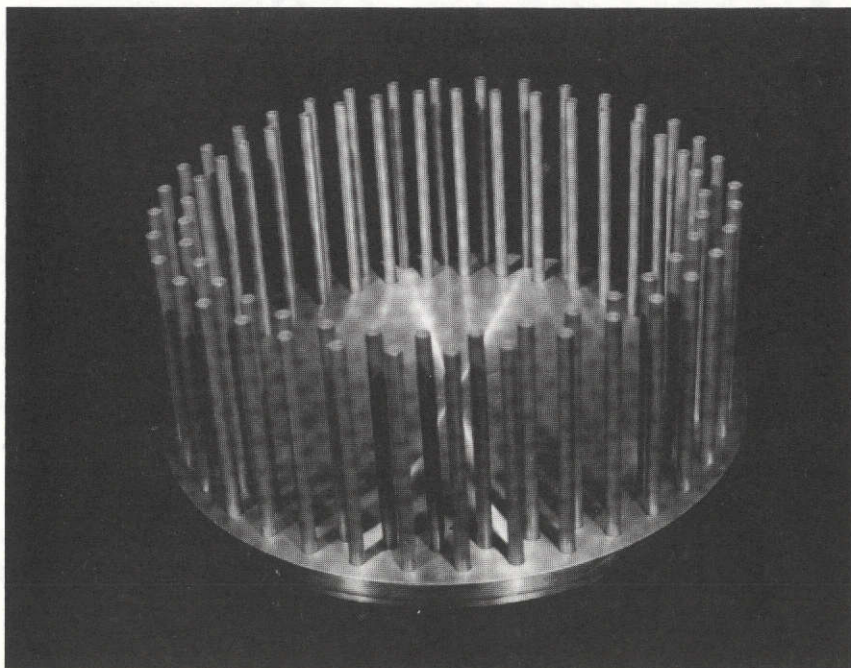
Type 2 Slinger Assembly (GESK56198-889)
